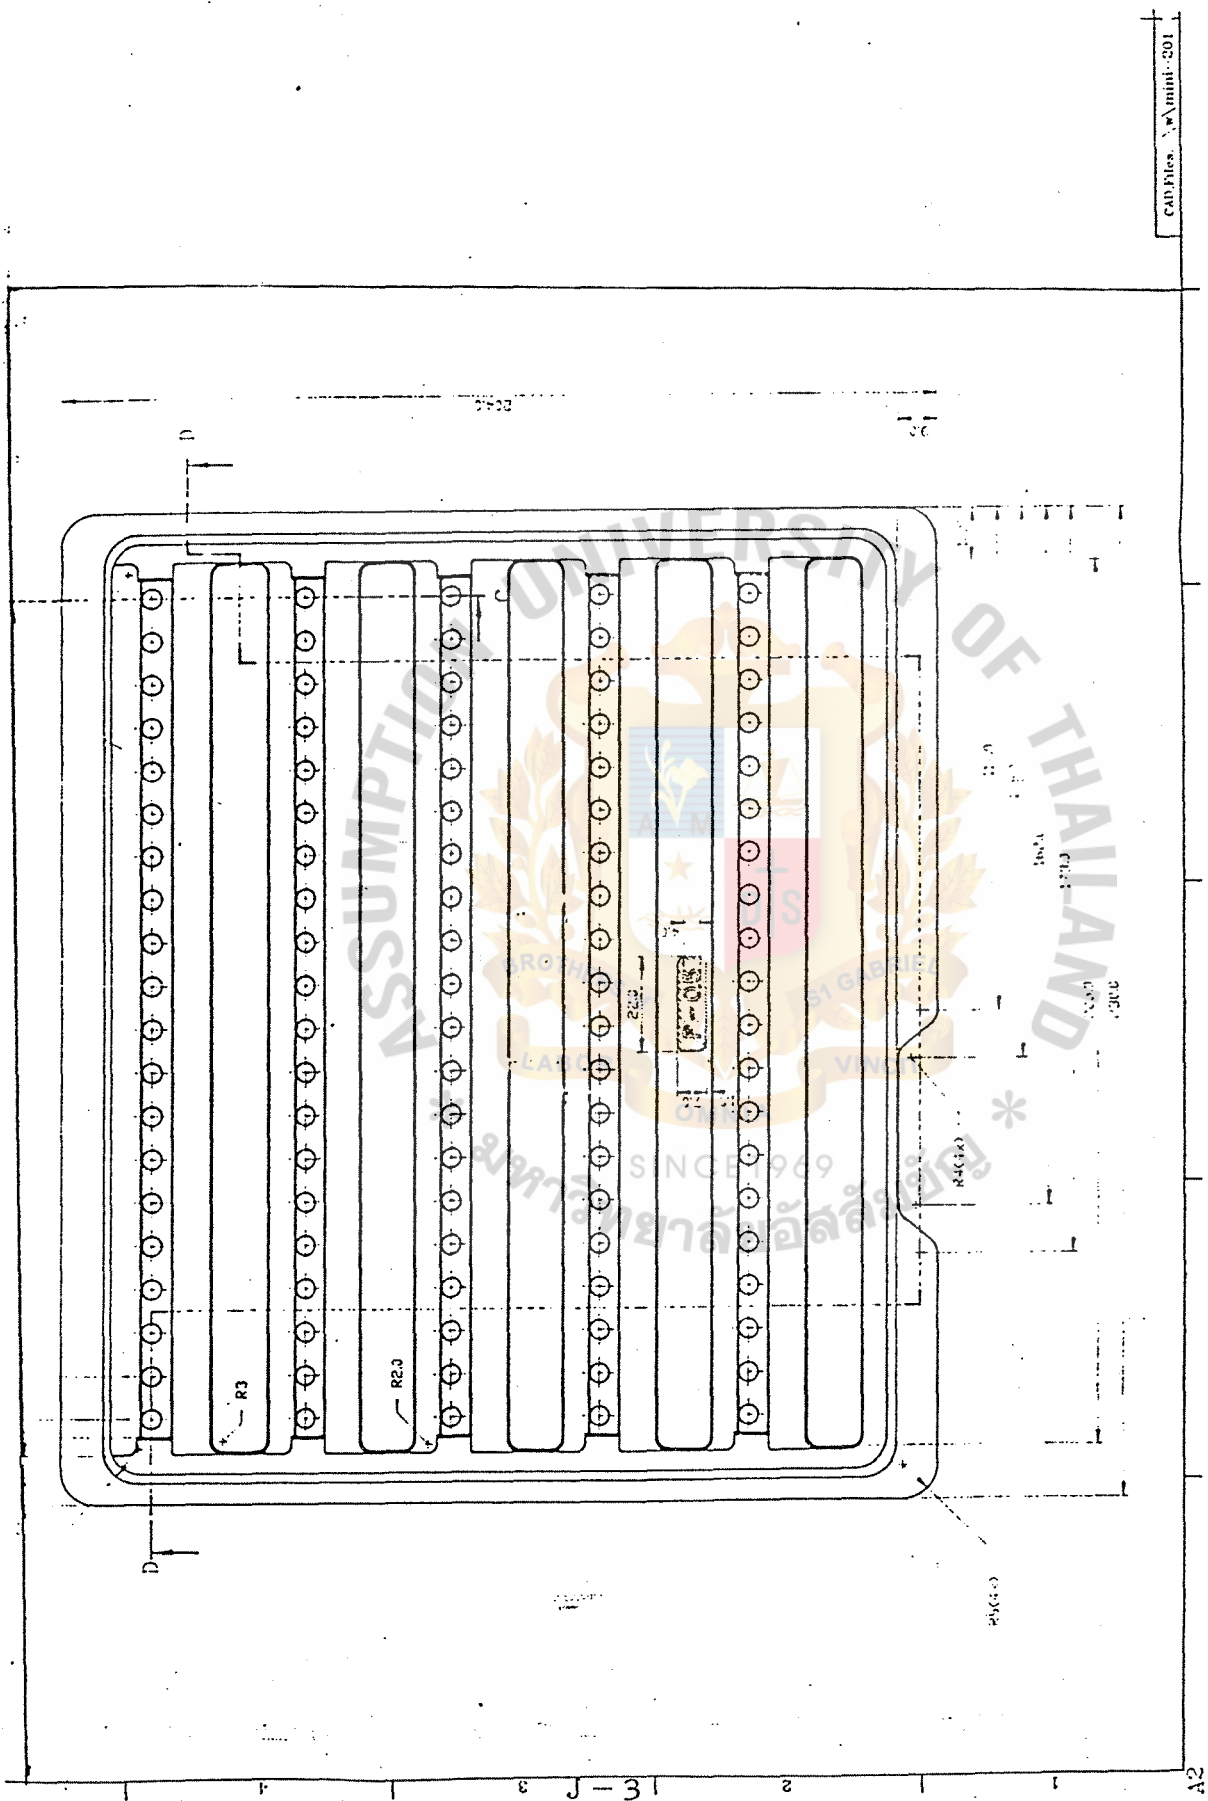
Sample of Designed Packaging (Cover) (CAD process)
